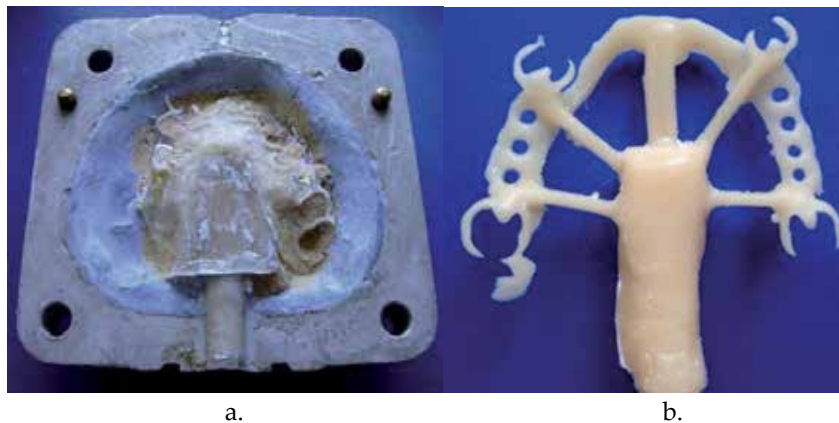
Disassembling the framework of the acetal resin removable partial denture (a) The framework is still in the flask (b) Disassembling is complete
